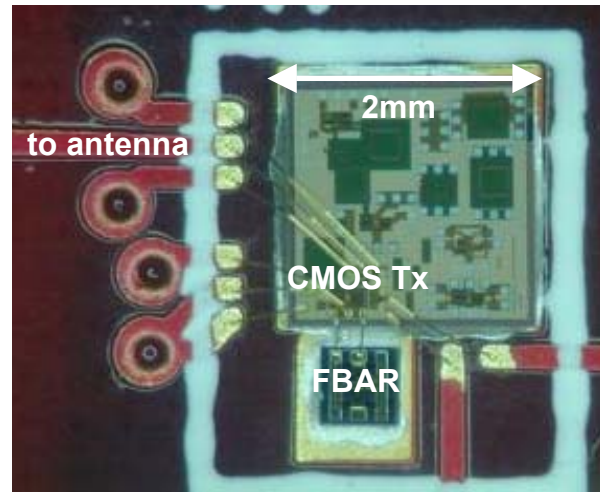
Photograph of Transmitter Chip-on-Board Assembly
